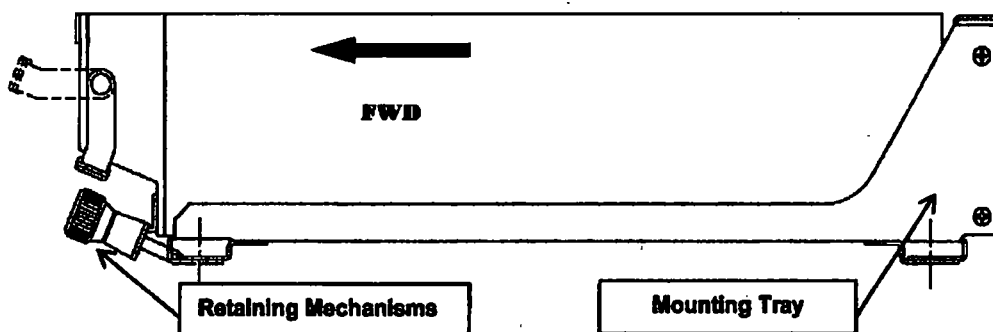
Typical Mode S Transponder Outline and Mounting Drawing
